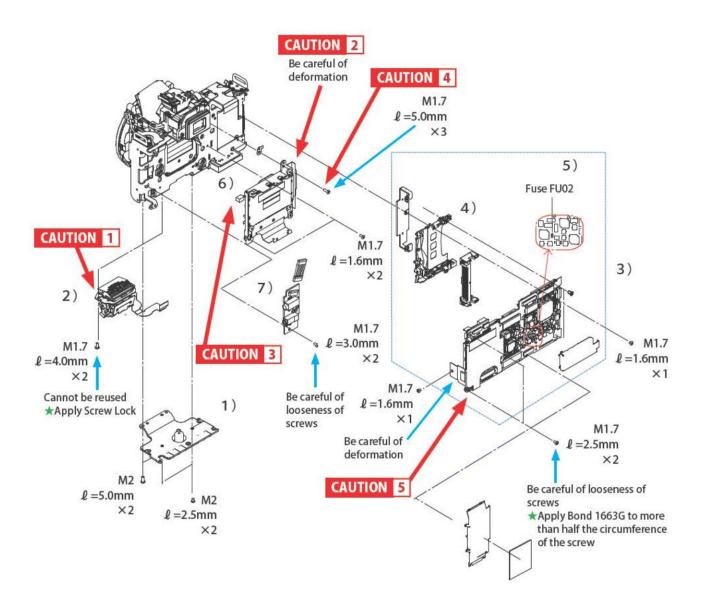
Removal of the Tripod Socket Plate, Main PCB, Interface PCB, CMOS Sensor Ass'y, and AF Unit
